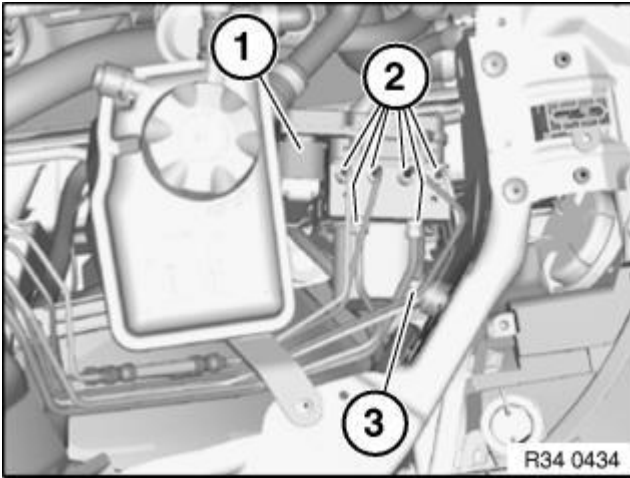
Release Screw (3) And Remove Hydraulic Unit
